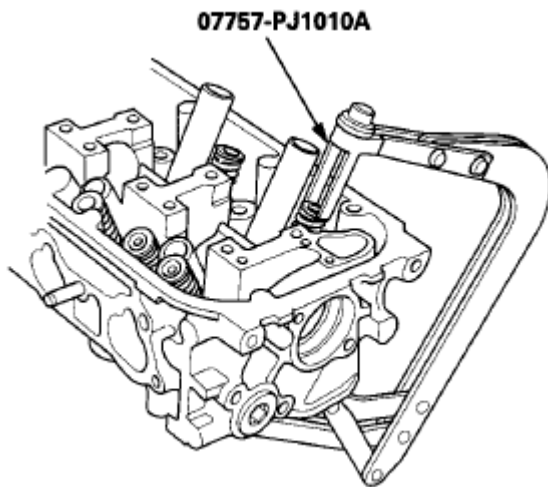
Installing Valve Spring Compressor Attachment And Valve Spring Compressor
